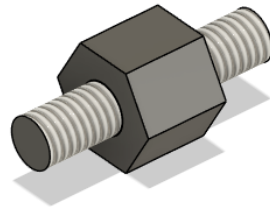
Bolt connecting the load cell to the test piece holder.
